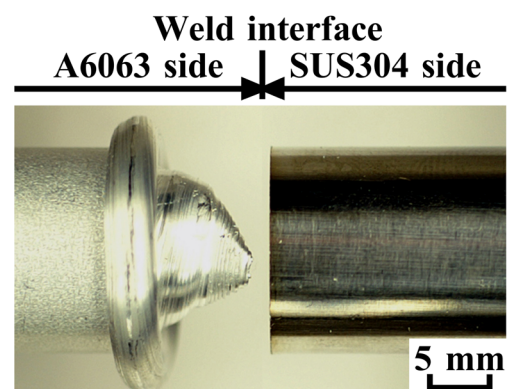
Example of appearance of joint tensile-tested specimen with flash: weld interface fracture
